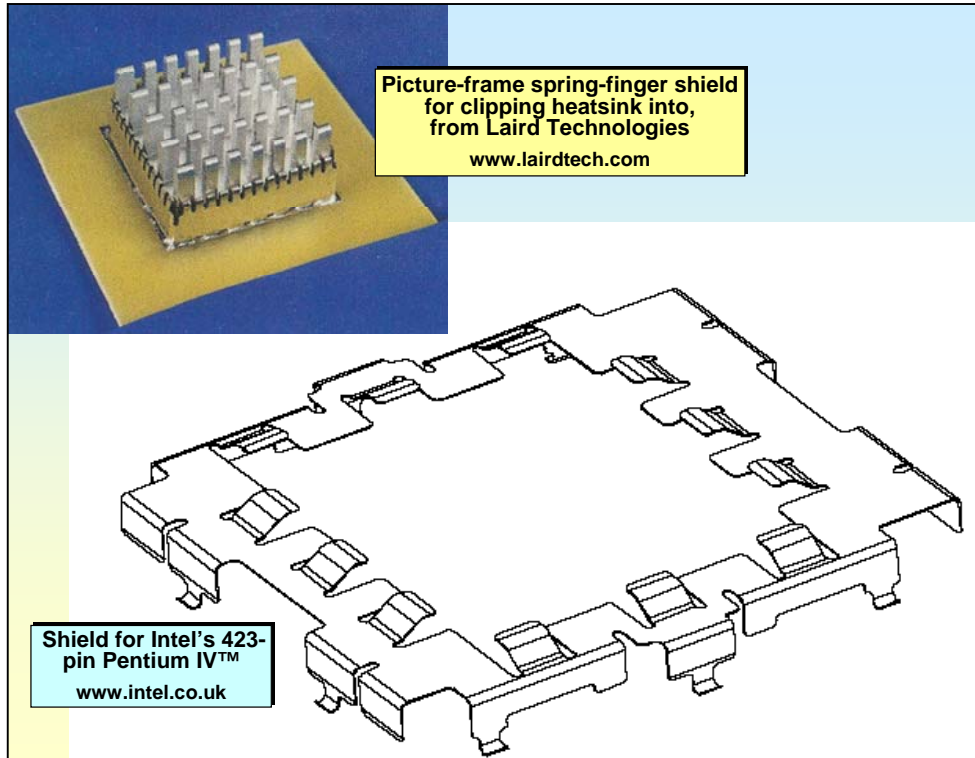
BD Examples of commercially-available parts for combining shielding with heatsinks
